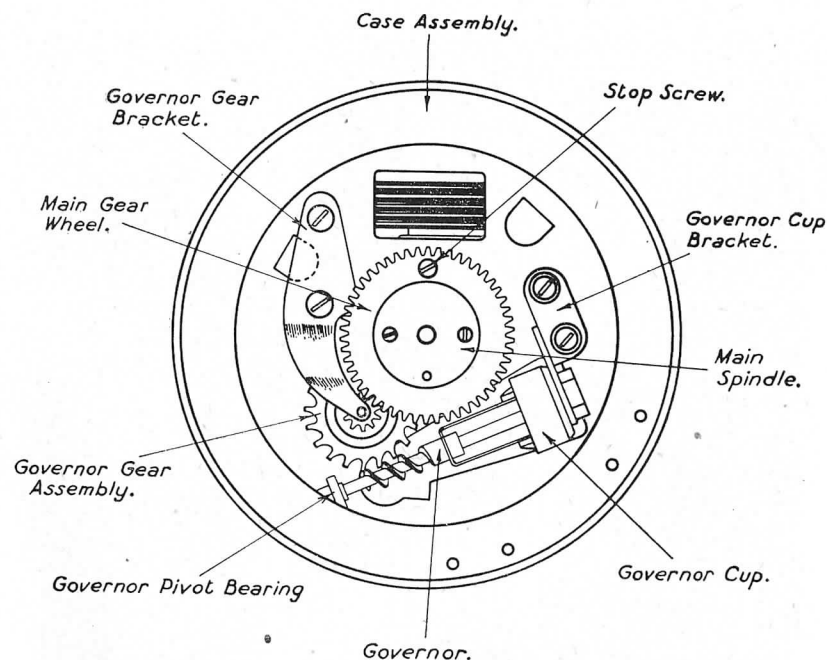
FRONT VIEW OF DIAL, WITH FINGER PLATE REMOVED
